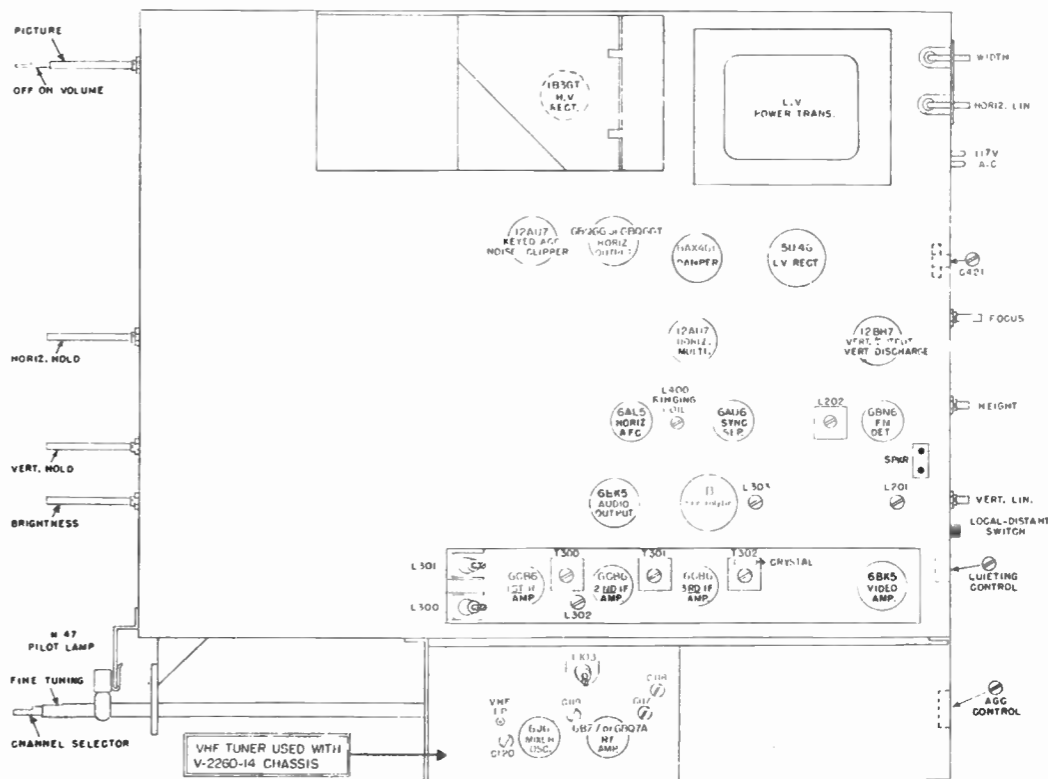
TOP VIEW OF V-2260-12 AND V-2260-14 CHASSIS
